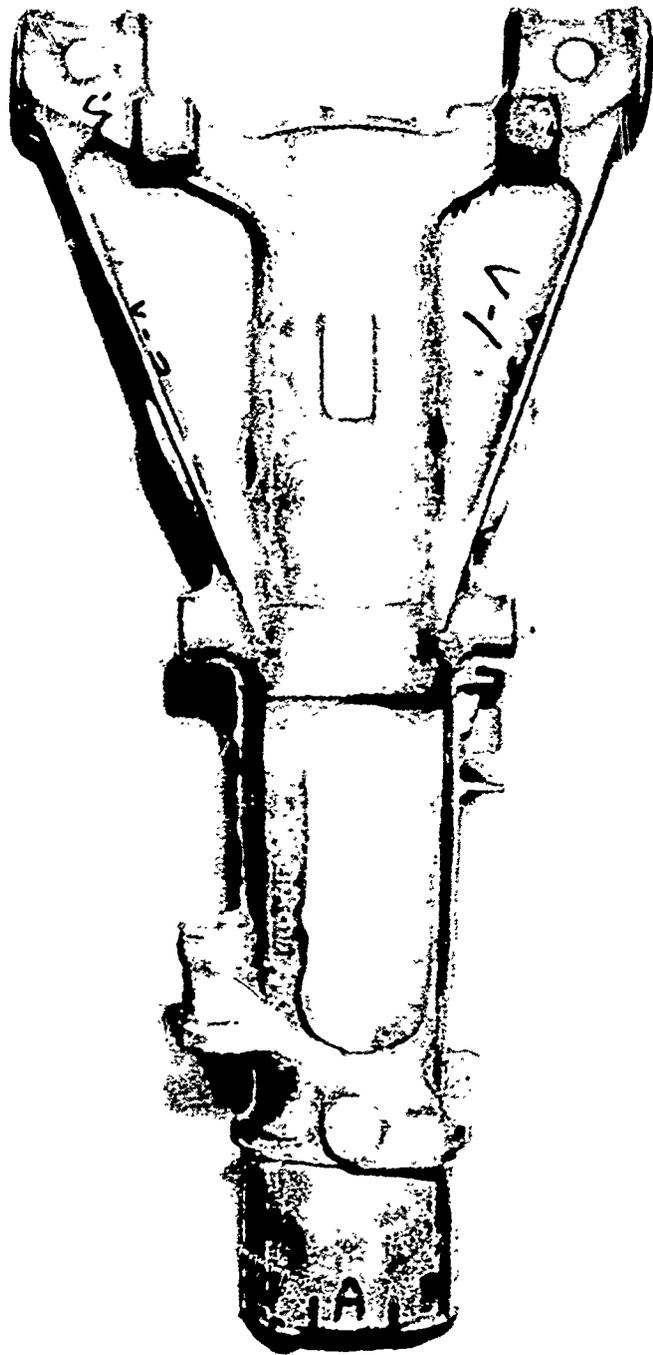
ALUMINUM ALLOY 356 CASTING MADE WITH FIRST MOLD RIGGING
